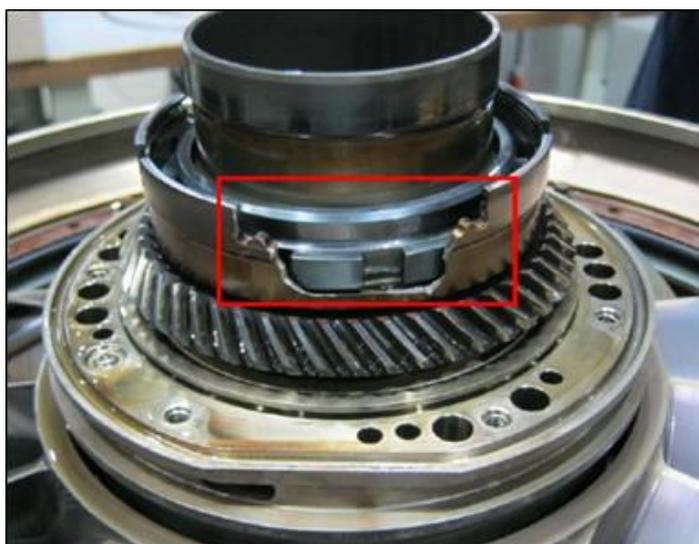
No. 4 Bearing Key washer from Engine S/N FA0492 exhibiting distress and fracture (*Pratt & Whitney Canada*)
